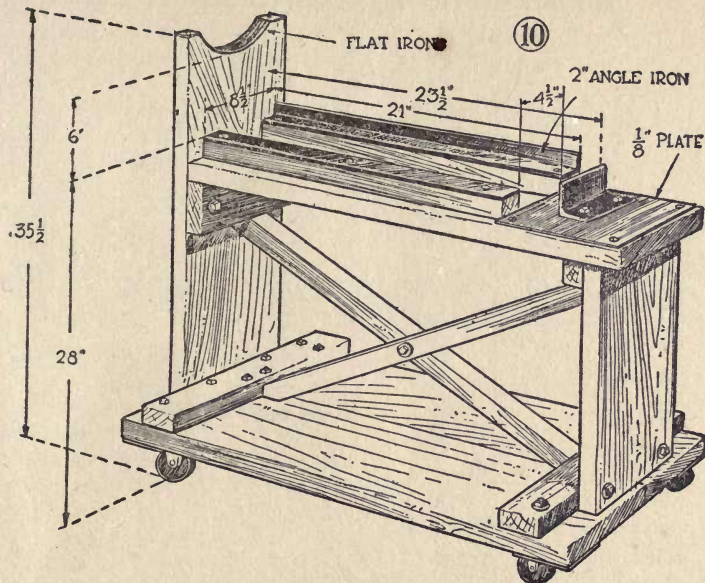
Wooden engine stand for holding the assembled engine upside down for easy removal of the crankcase and subsequent work on the bearings and connecting rods. The head is removed from the engine before transferring it to this stand
